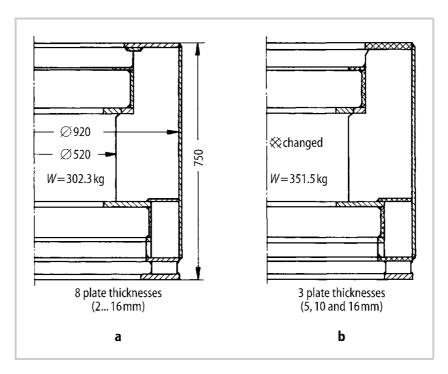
Electric motor housing of welded construction (Siemens): a current design; b proposed design
